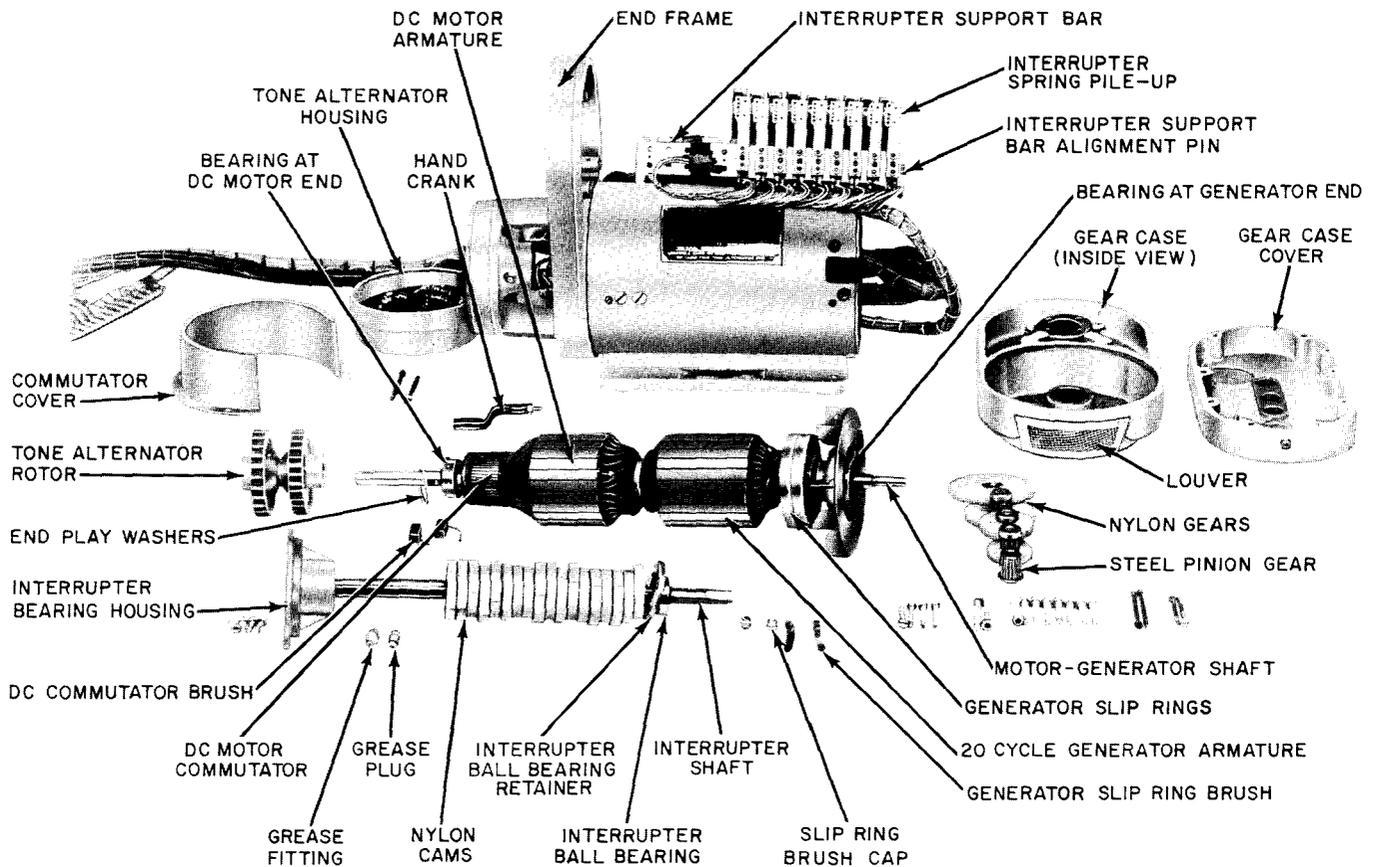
DC Motor-Driven Ringing Machine—Detailed Disassembly Commercial Electric Products Company (Same design previously manufactured by Holtzer-Cabot)
